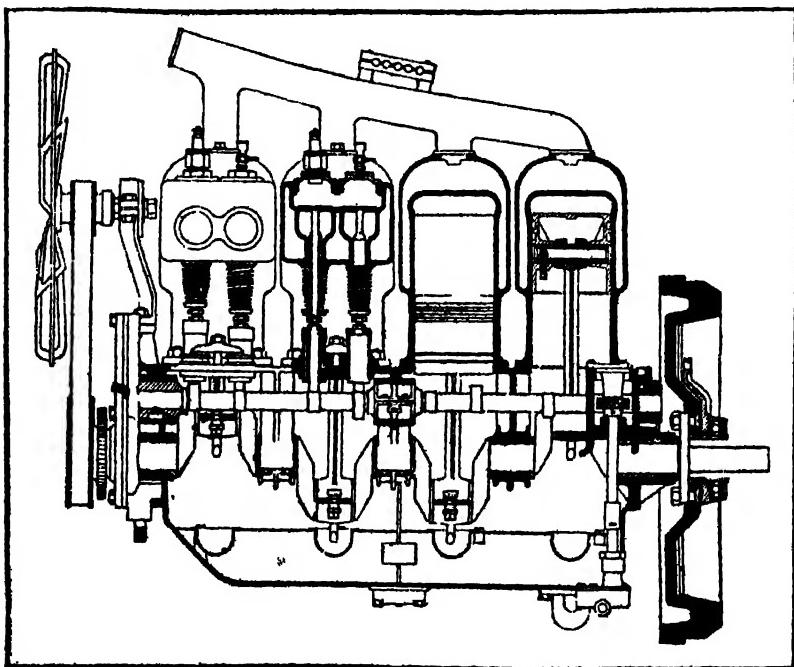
Longitudinal Sectional View of Overland Four Cylinder Motor, a Type Having Individual Cylinder Castings and a Five Bearing Crankshaft.
